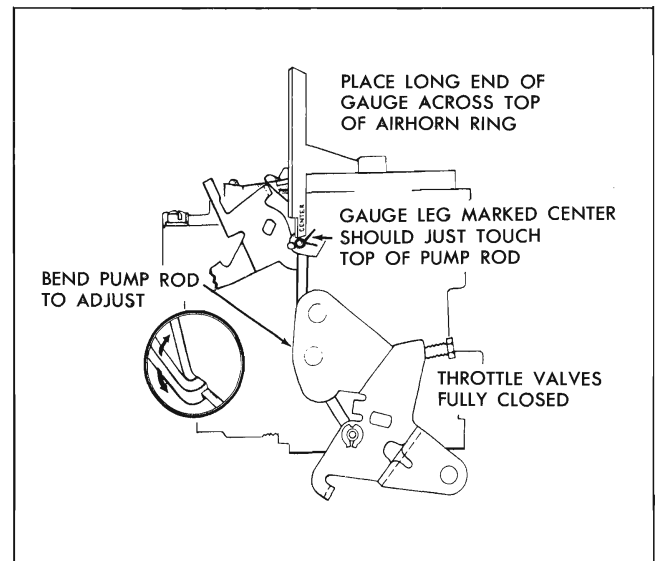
B-49 Pump Rod Adjustment—Center Carburetor
